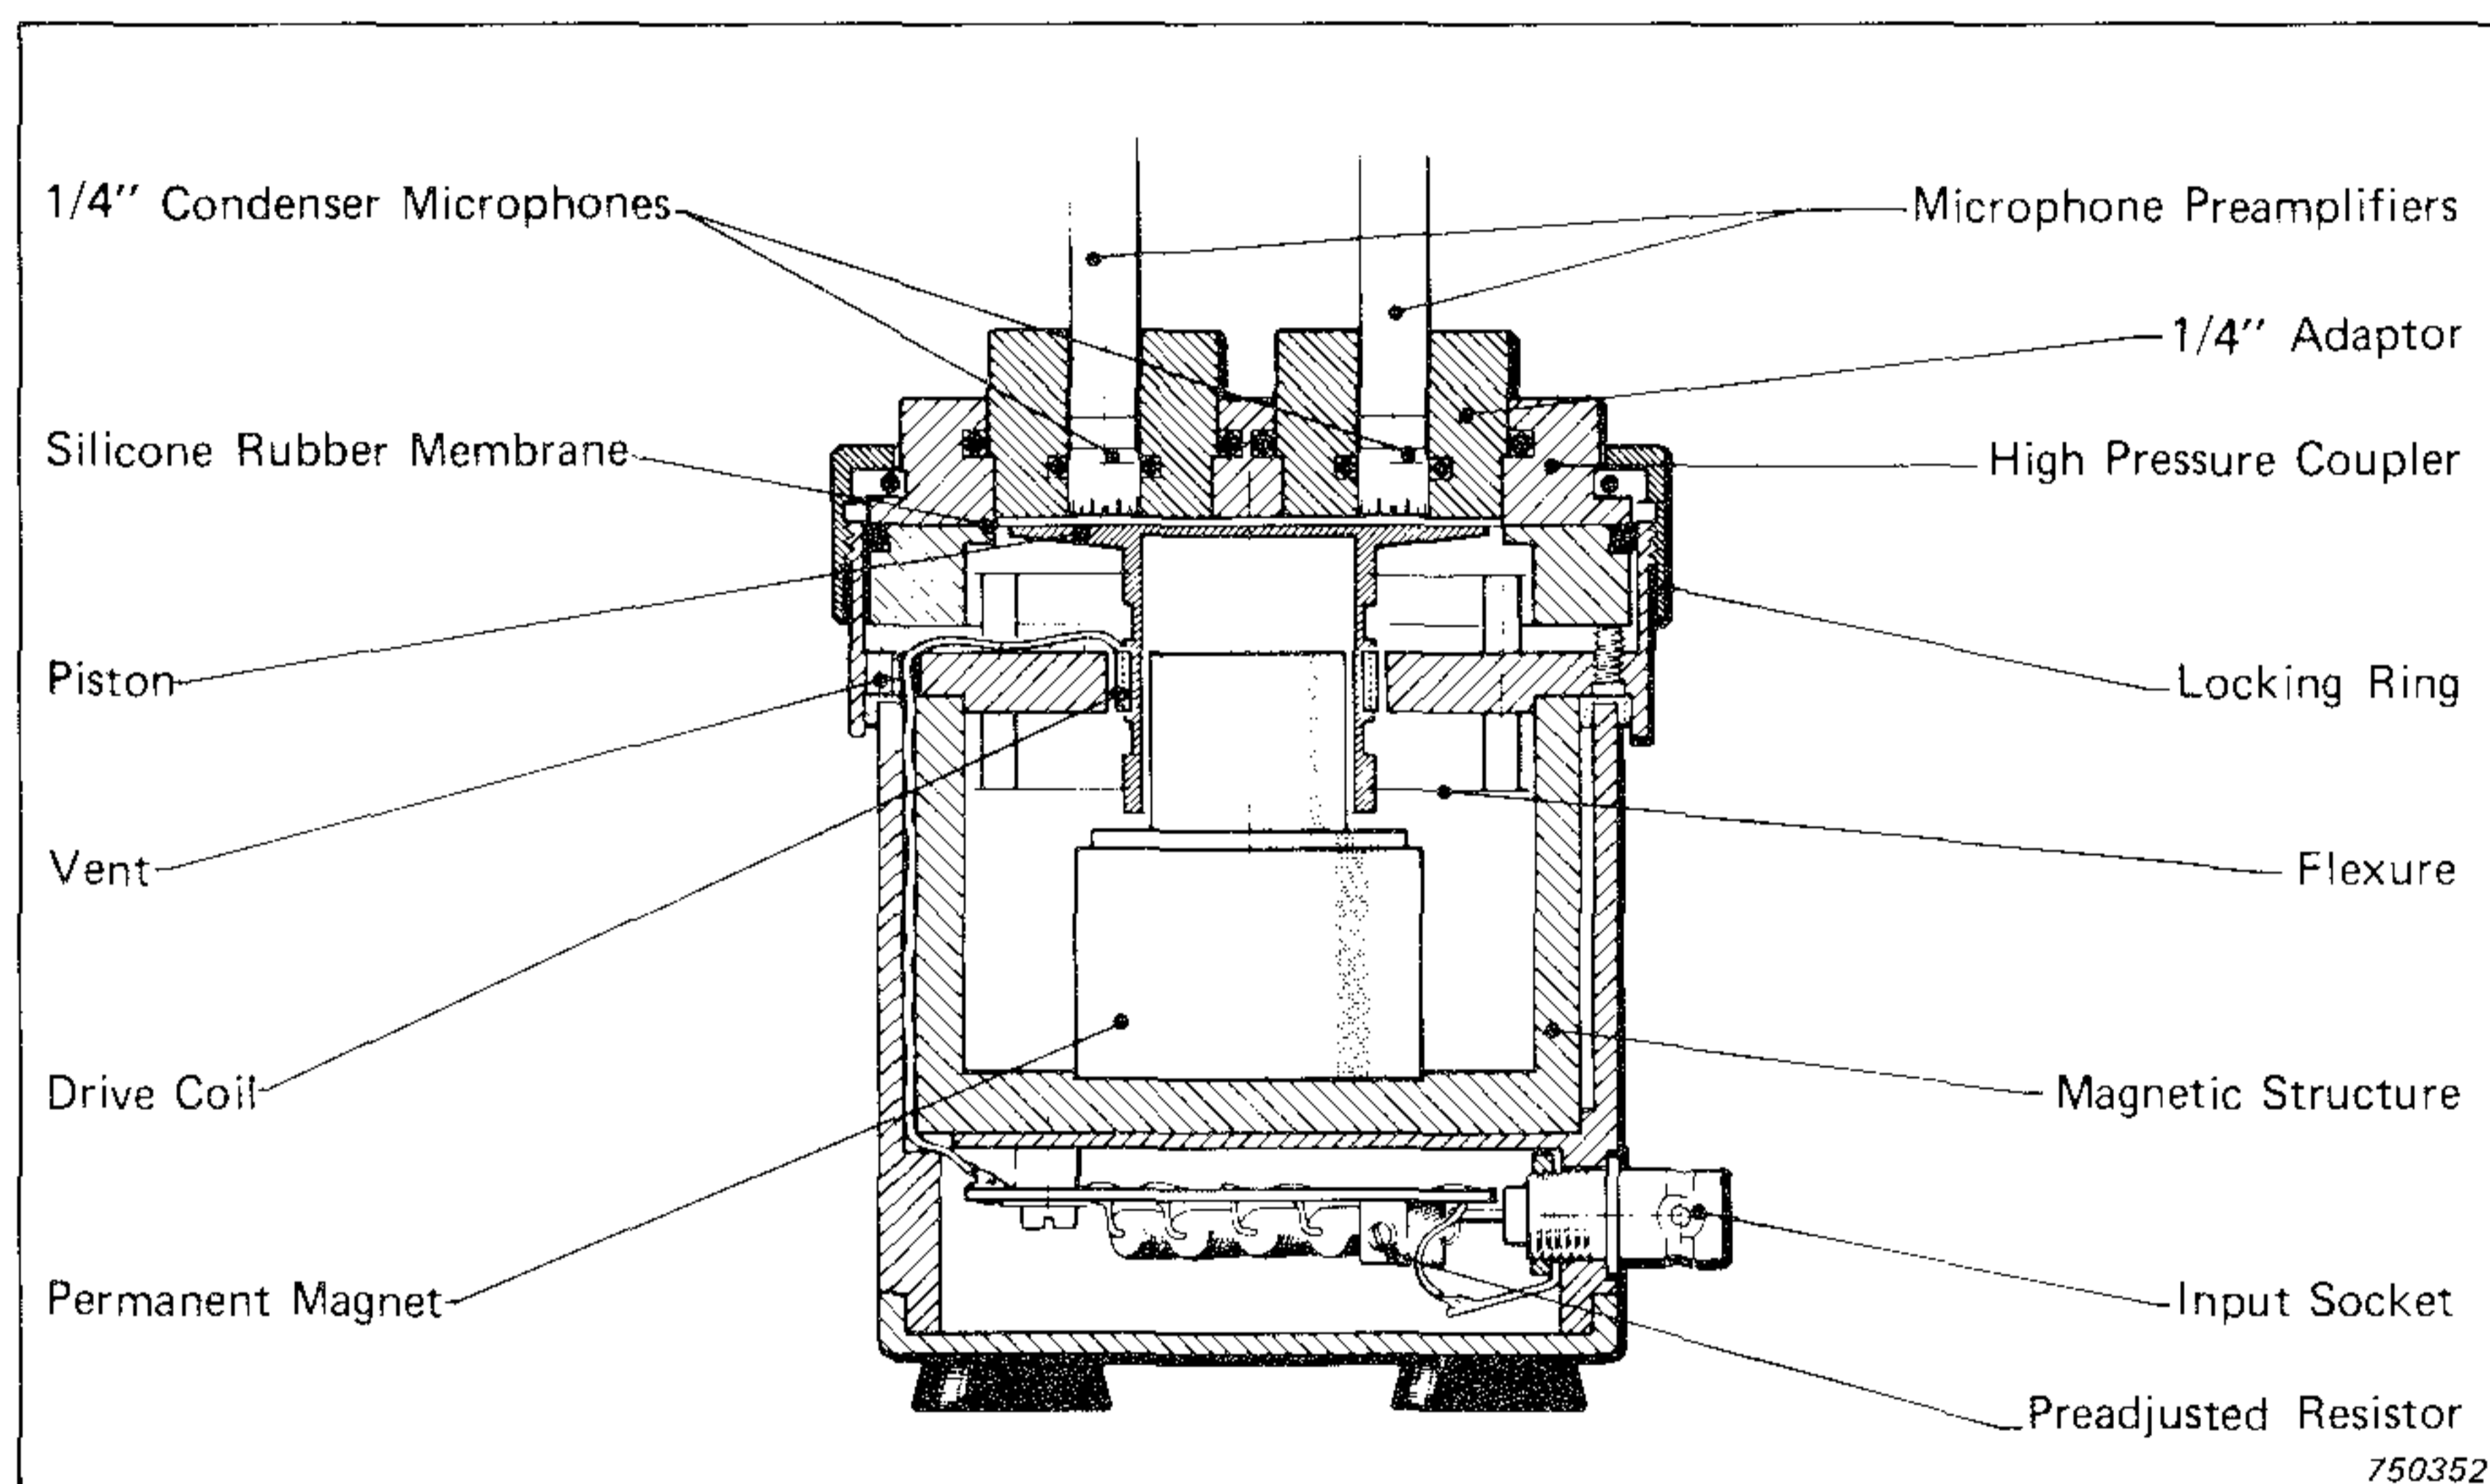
Sectional drawing of the 4221 with the high pressure coupler
